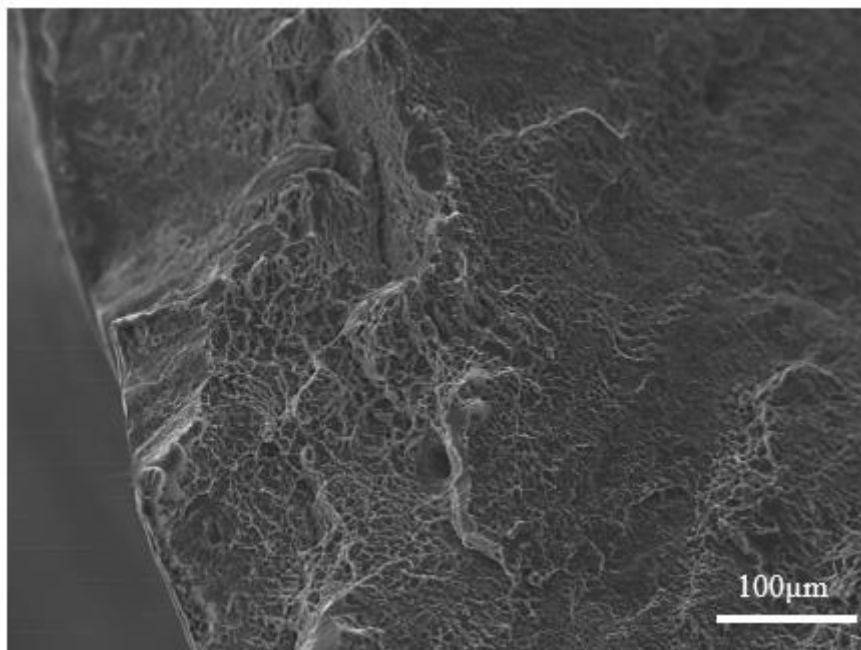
Porosity and dimples on 00T fracture surface
